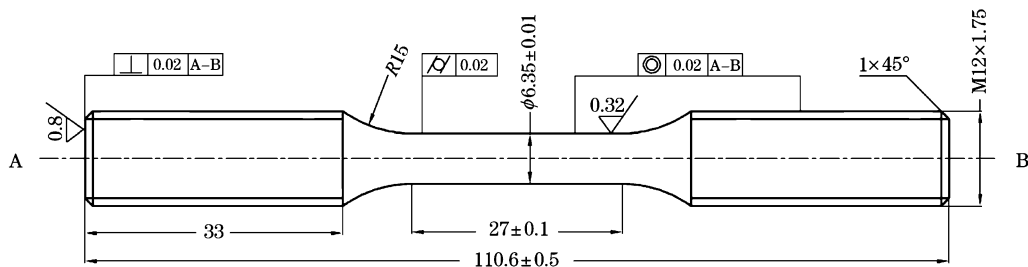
Dimension of fatigue specimen (Unit: mm)
